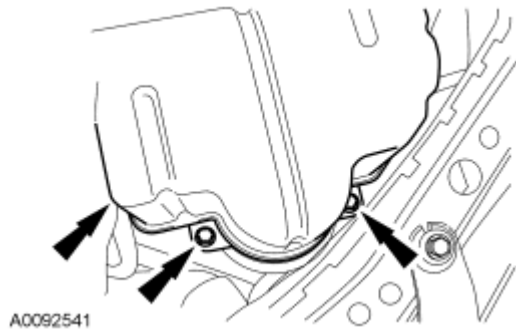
Locating Air Cleaner Outlet Pipe, Air Intake Resonator And Bolt
